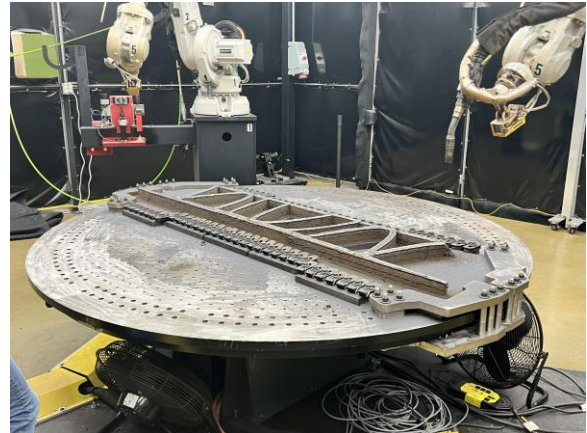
MedUSA build table initial printed layers and steel clamps.
